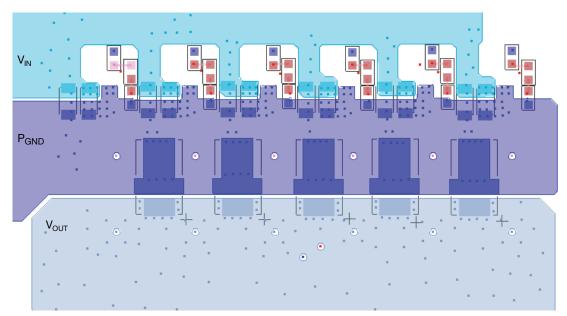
Multi-Phase VRPower Layout Bottom View
